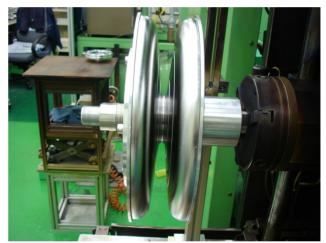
Dumbbell fabrication by joining two half cells by using the electron beam welding.
